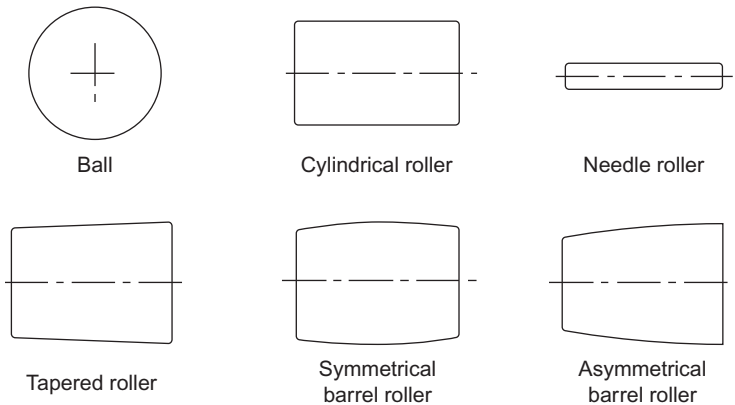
Various types of rollers used in a rolling bearing (courtesy FAG bearings).
